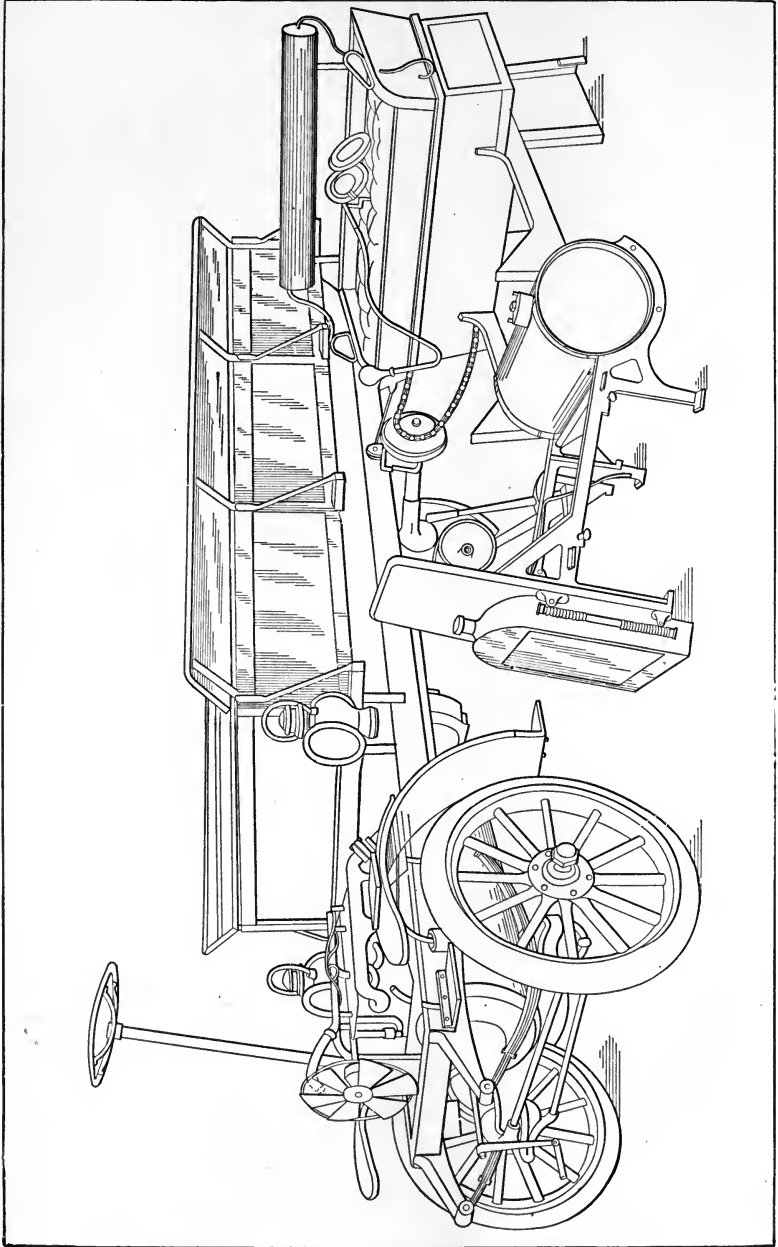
Showing Method of Installing Engine in Light Truck. Seat and Dashboard Units Removed to Illustrate Accessibility of Engine if Extensive Repairs are Necessary.
